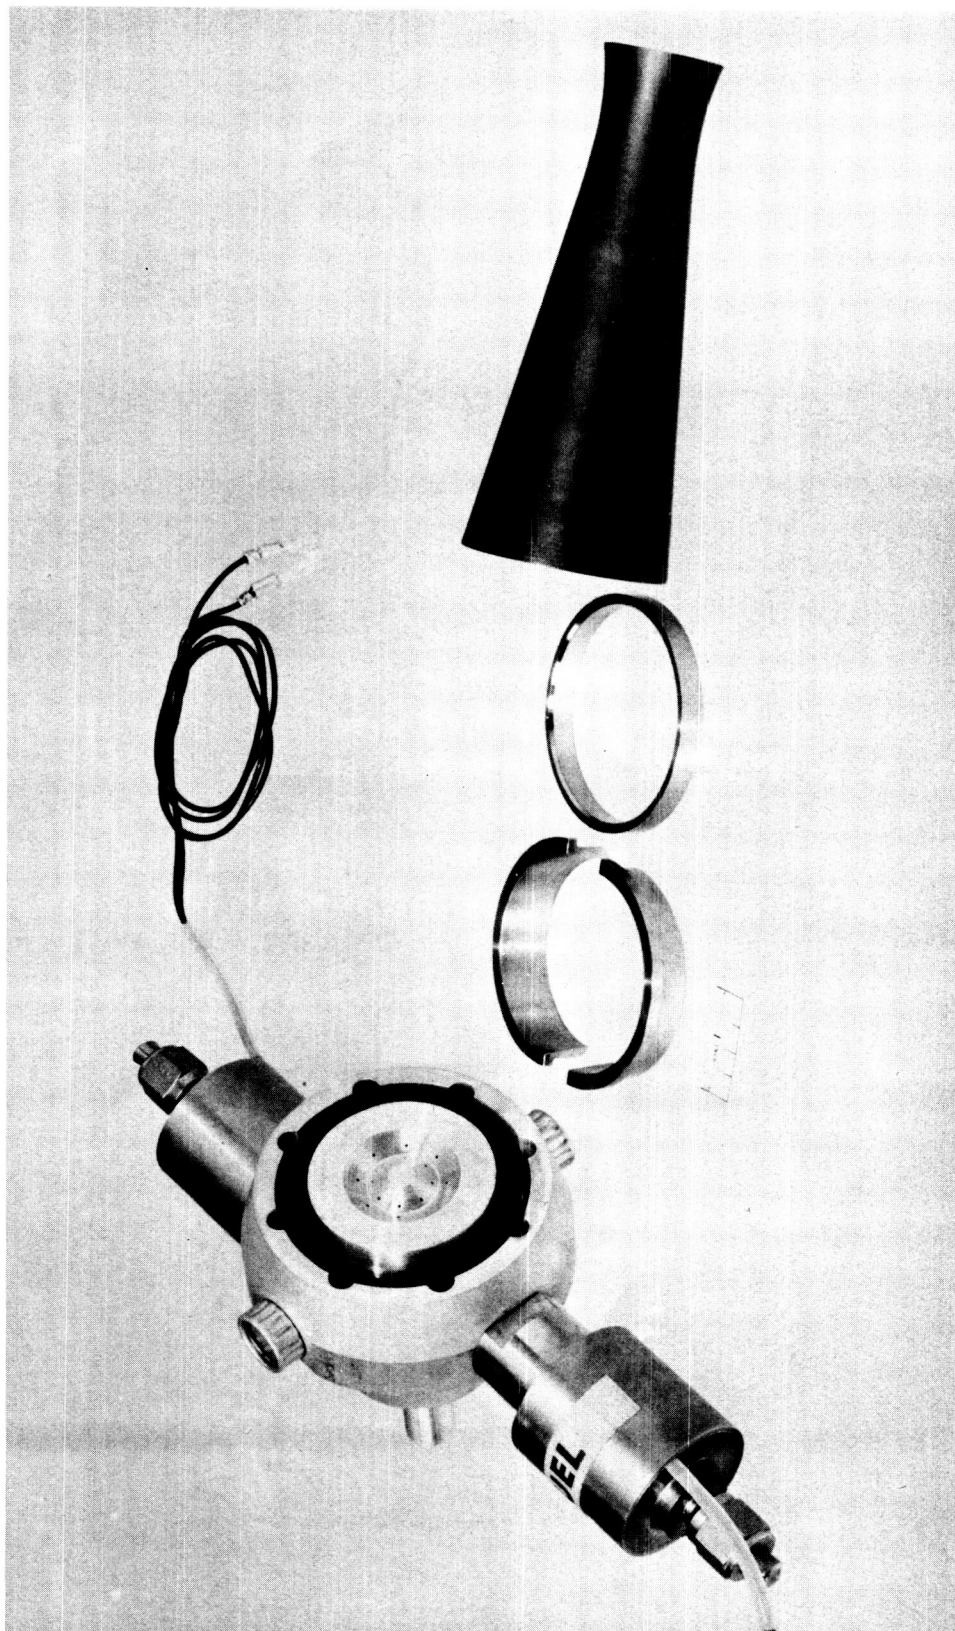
Sea Level Motor and Injector--Disassembled
